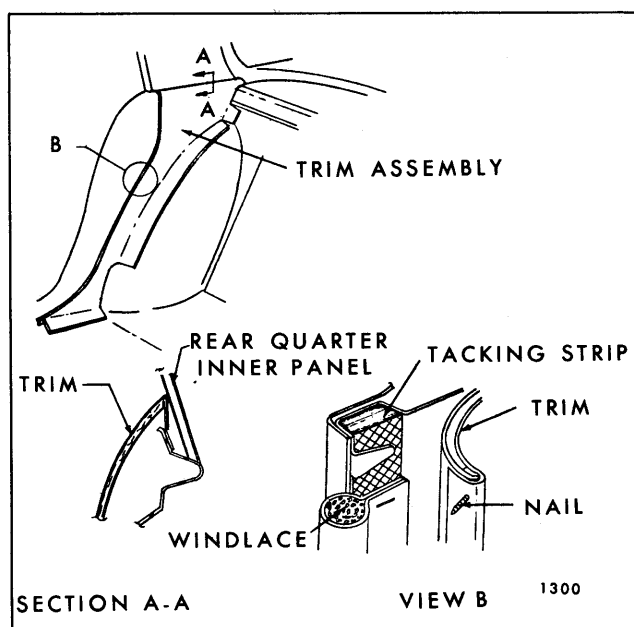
Rear Quarter Lower Trim Assembly - "B-C 39-49-69" Styles
